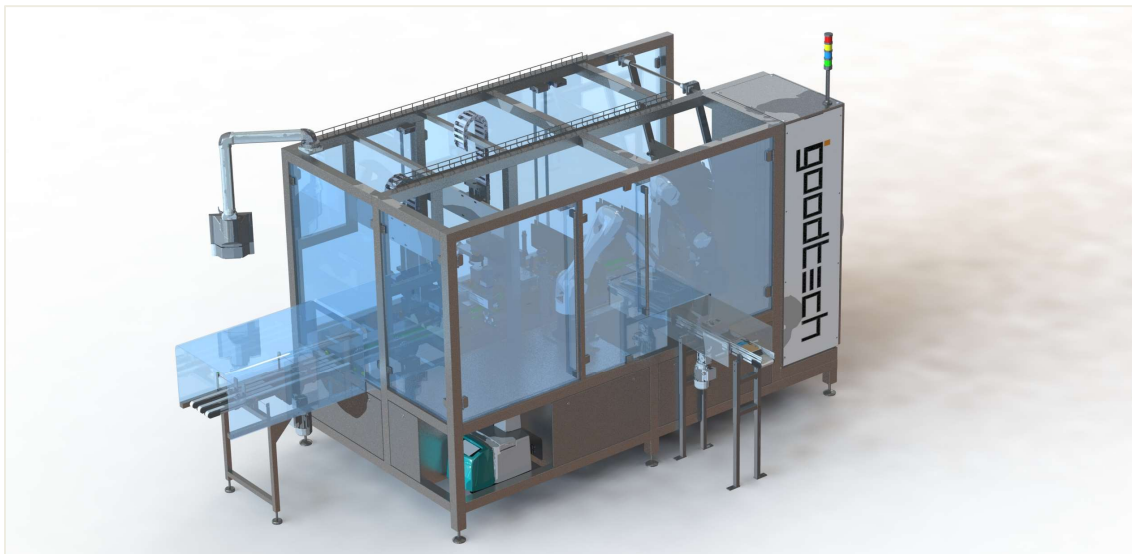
Wraparound (WA) Packaging Machine [2].
